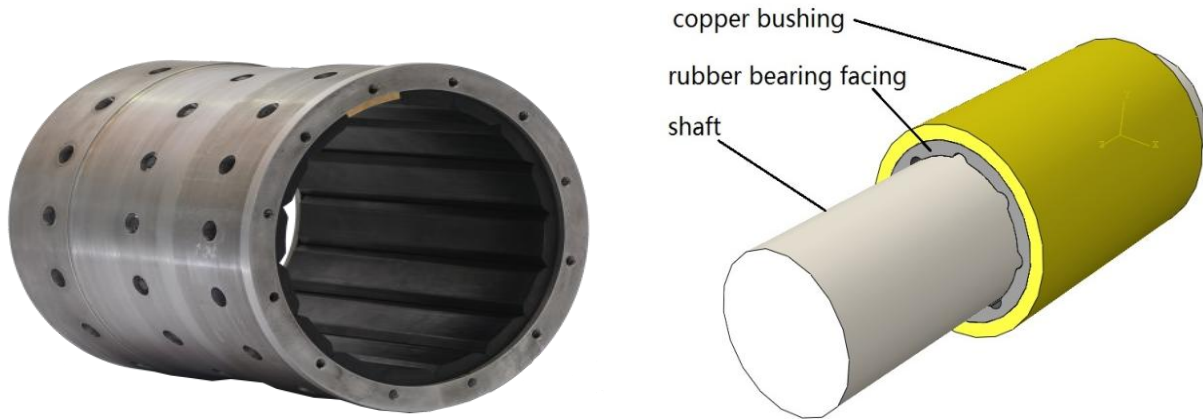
Structure of the elastomeric bearings      Figure 2: FE model of elastomeric bearing system
